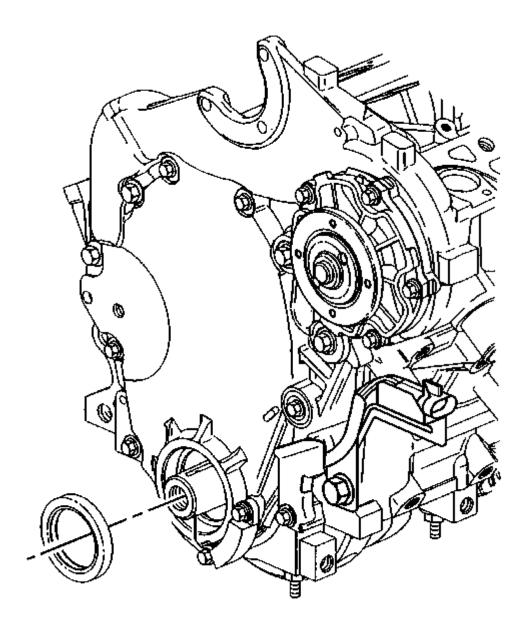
Removing Crankshaft Front Oil Seal Courtesy of GENERAL MOTORS CORP.
